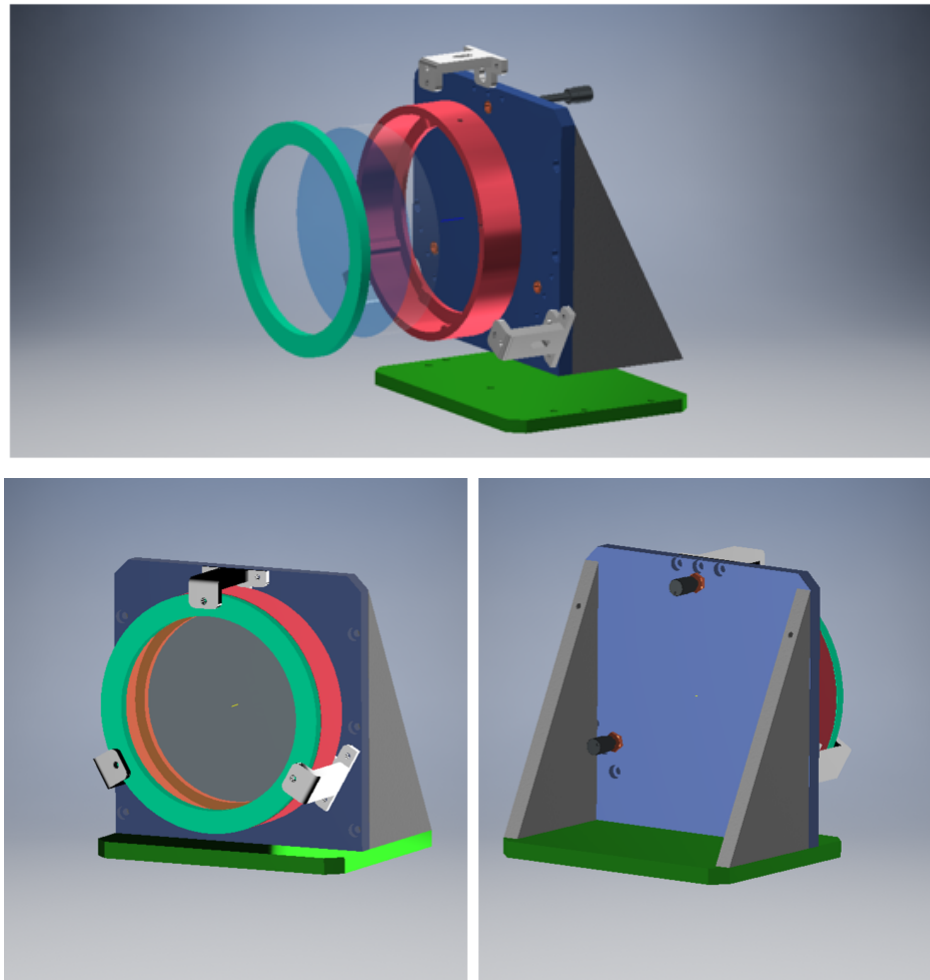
Top: The exploded view of the collimator mount showing all parts in the assembly. Lower Left: The front side of the collimator mount showing the ring structure (red) and cover (green) are being held with three clamps. Lower Right: The back side of the collimator housing structure showing micrometric screws (black screws) to be used for tip-tilt adjustment.
